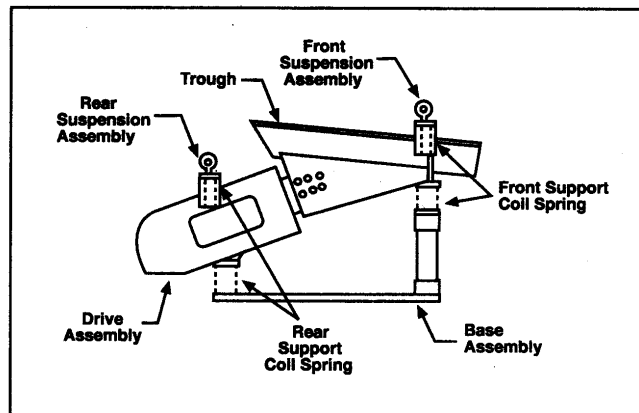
COMPONENTS OF FEEDER ASSEMBLY
